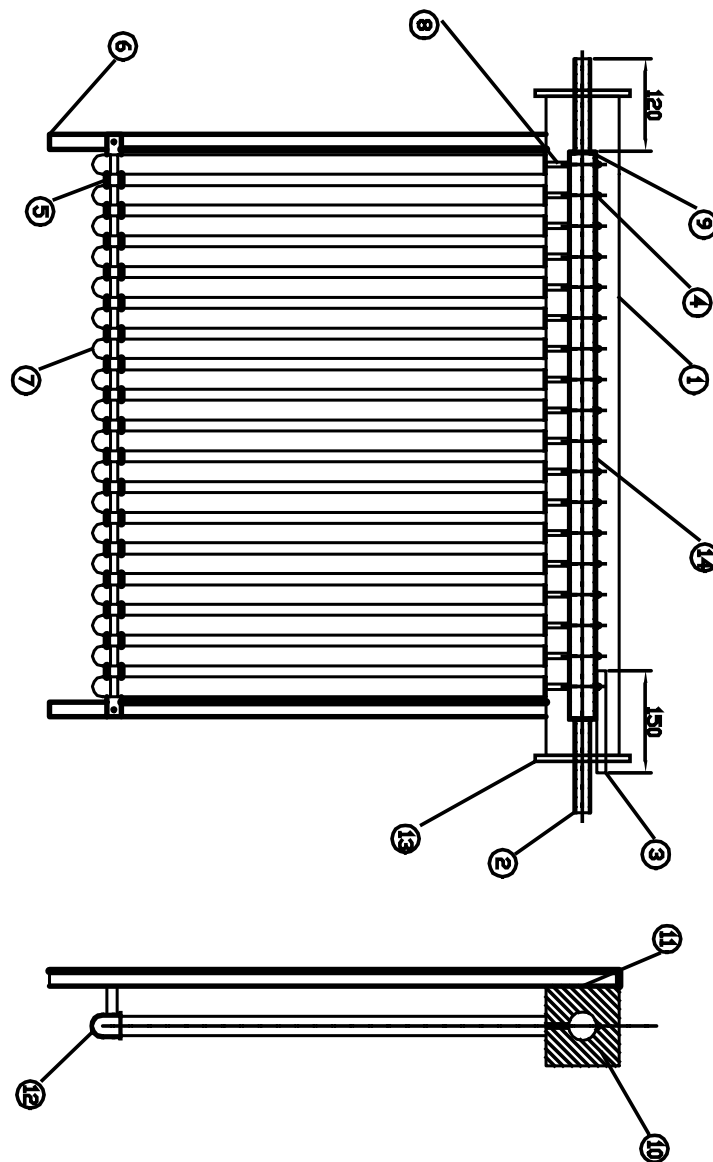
Drawing of absorber layout SPA-58-1800-18-C
